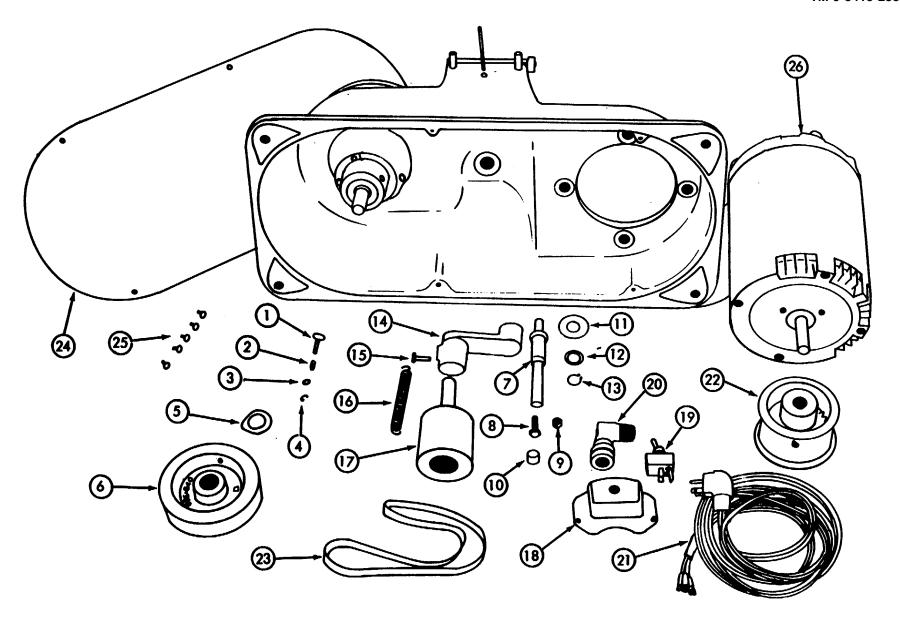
CRG-750 Heavy Duty Cap & Rod Grinder
